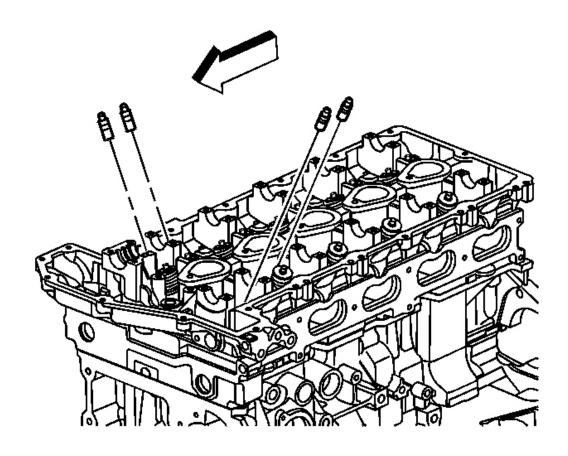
View Of Valve Lash Adjusters Courtesy of GENERAL MOTORS CORP.
